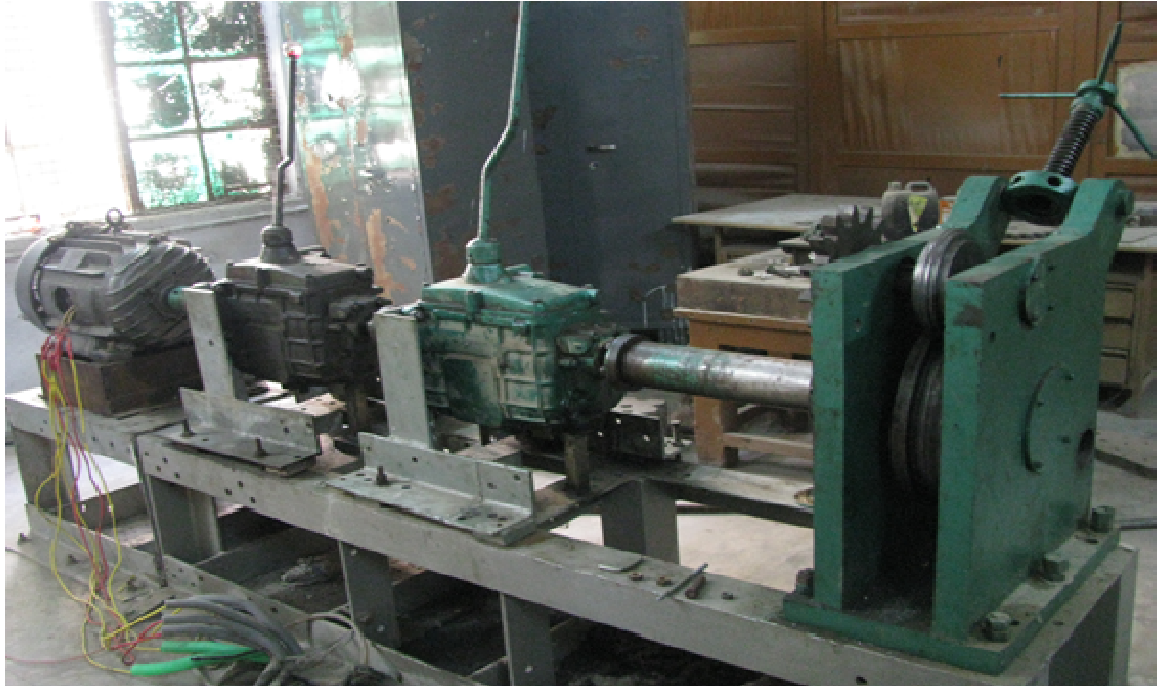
Modified Continuous Extrusion setup for 8 mm feedstock material
